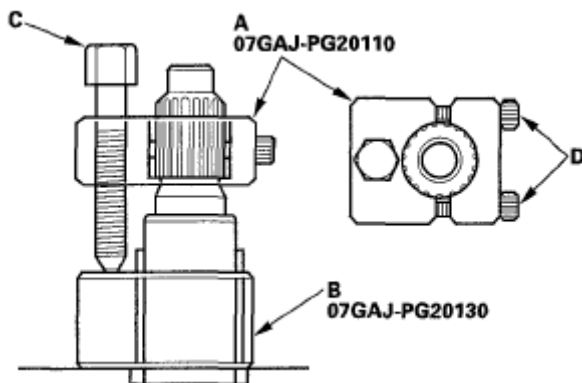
Identifying Mainshaft Holder And Mainshaft Base
